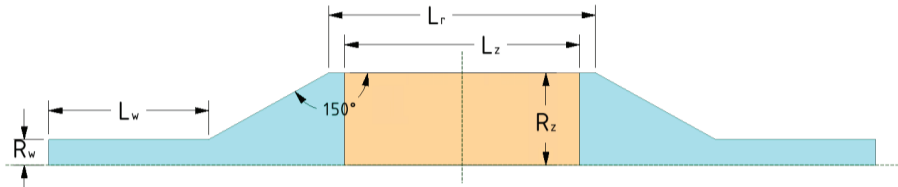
The view of the upper axial section of the TES unit with all dimensions.
